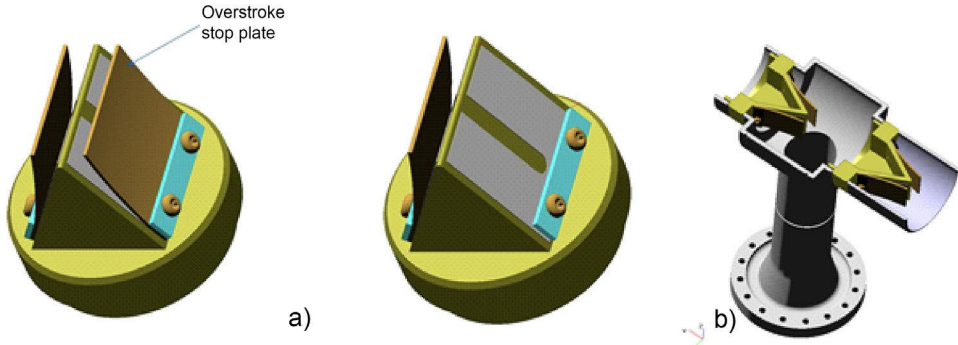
Reed valves a) reed valves b) reed valve module with suction and discharge valves mounted onto Thermal Buffer Tube.
